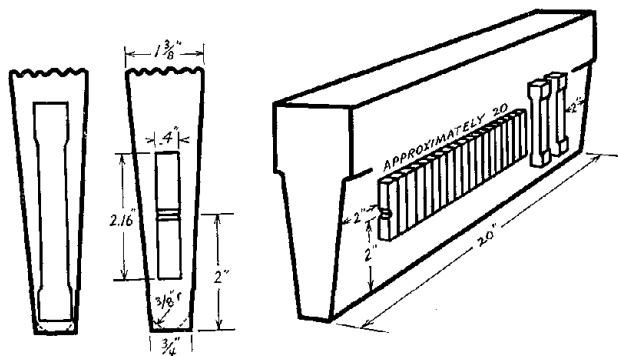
Watertown Arsenal design of 1-inch thick keel casting and method of casting
